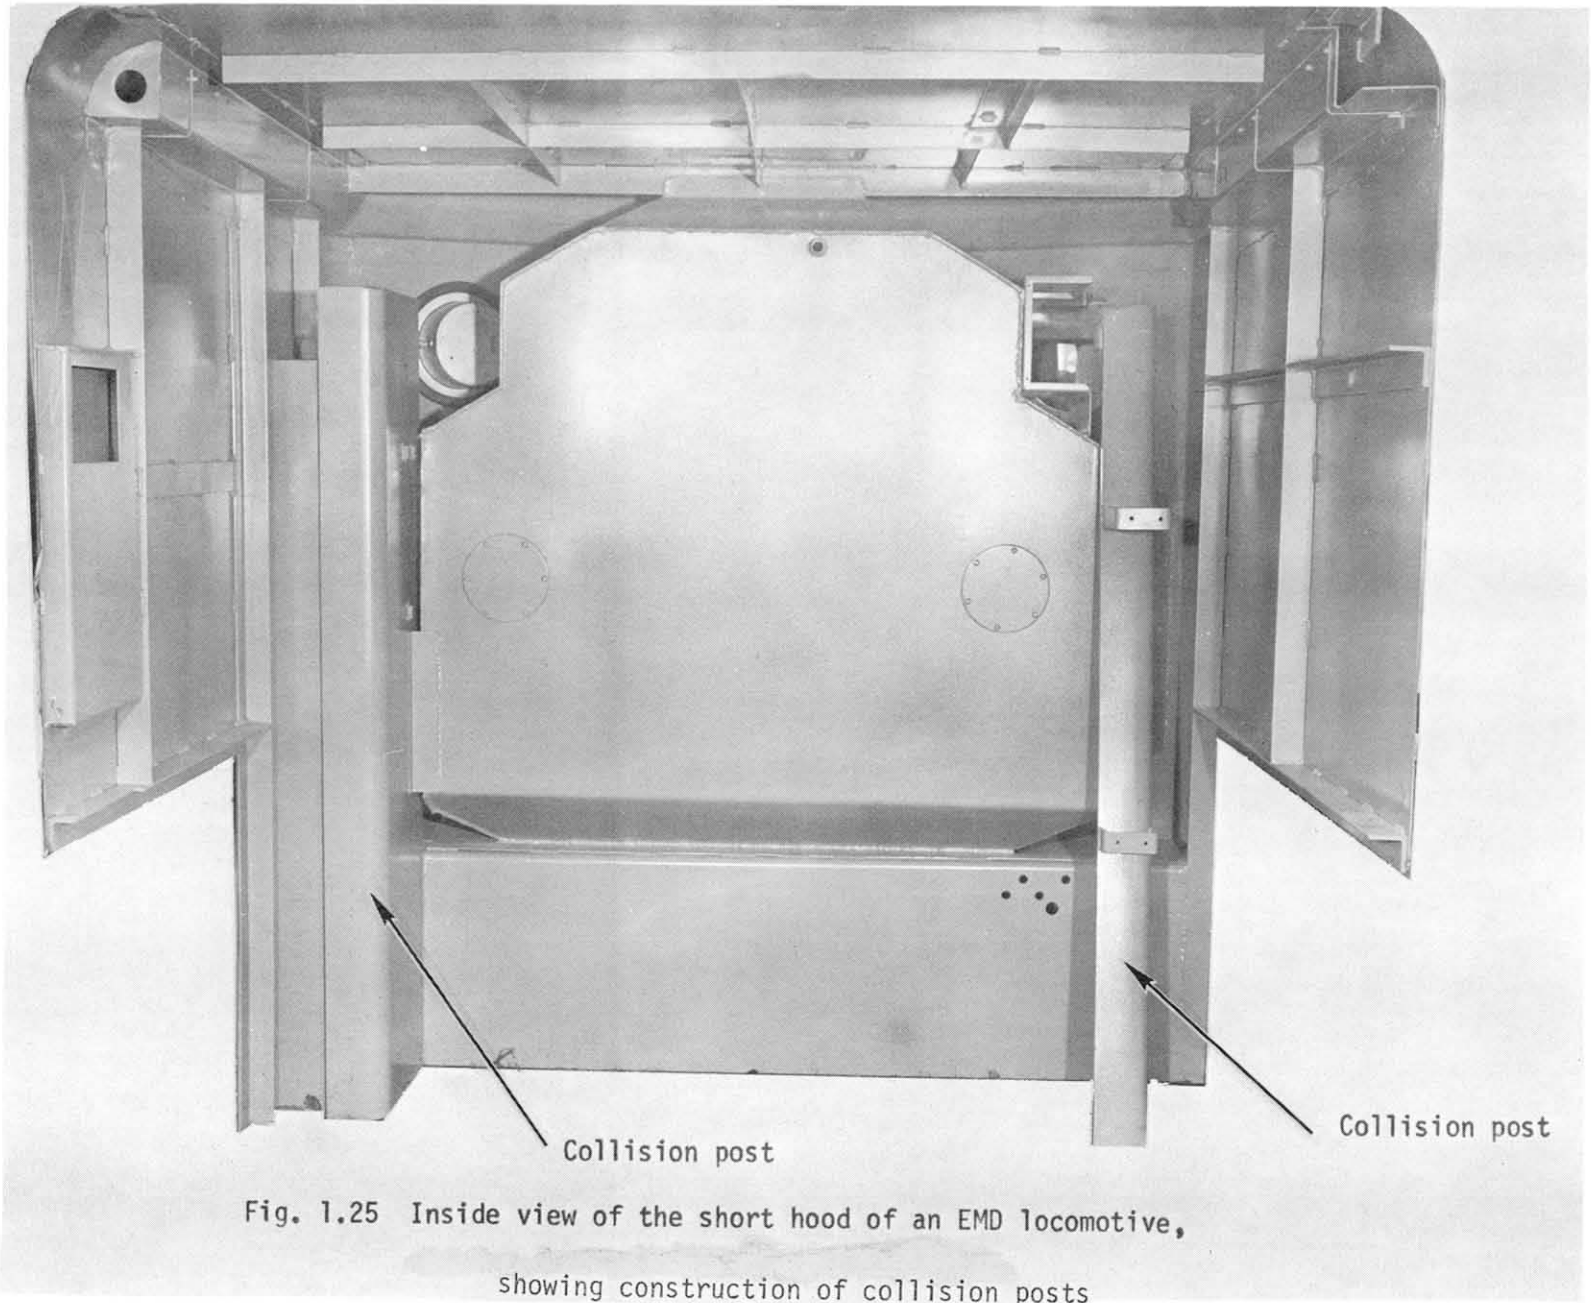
Inside view of the short hood of an EMD locomotive,
